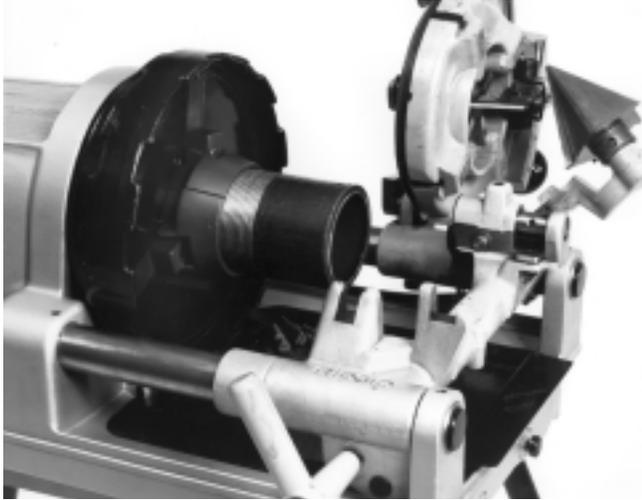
No. 419 Nipple Chuck Installed and Ready to Thread
